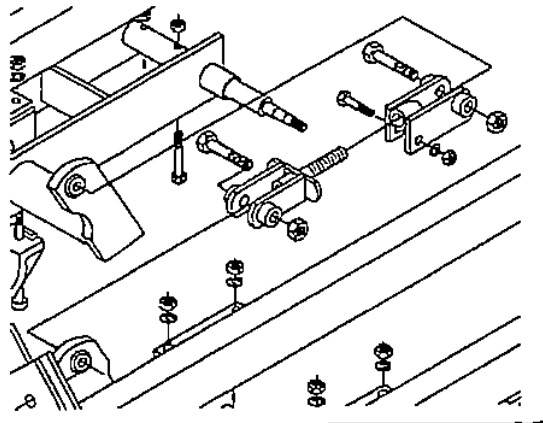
WHEEL LIFT CONN. ASSEMBLY
